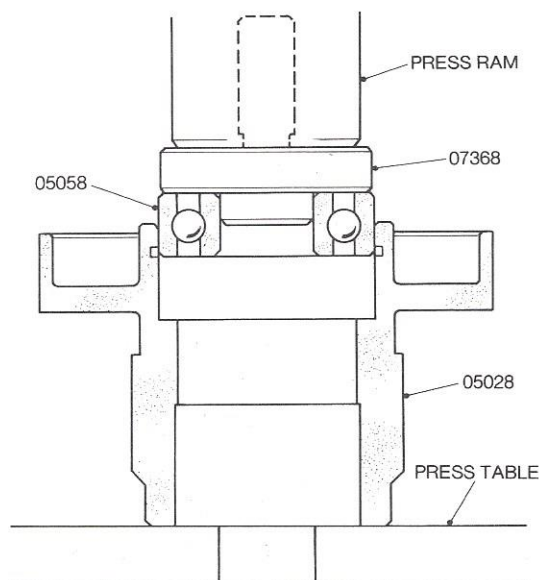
Assembly of the Crankshaft Housing Ball Bearing
